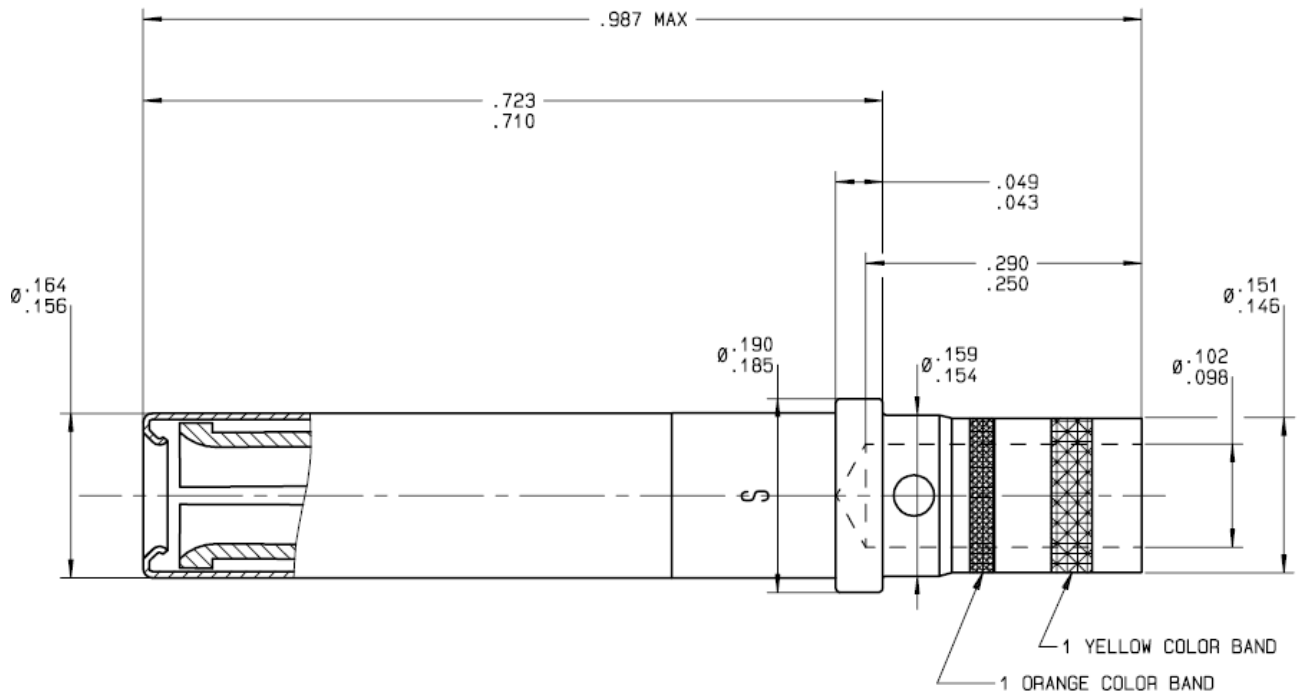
Size 12 Crimp Removable Socket Contact (In Inches)
